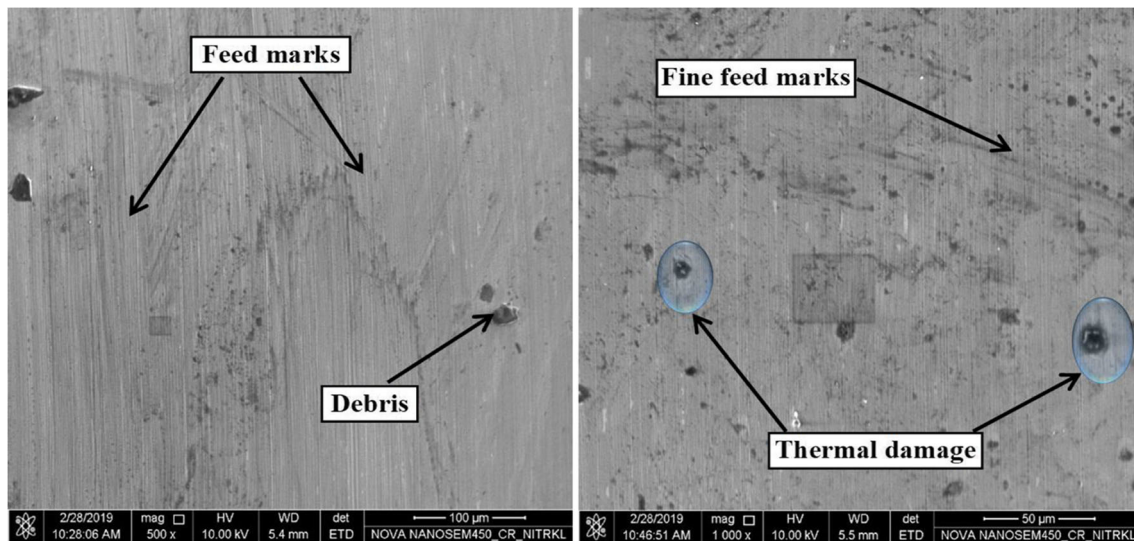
a Surface roughness found due to rapid tool wear, b Unwanted damage on machined surface
